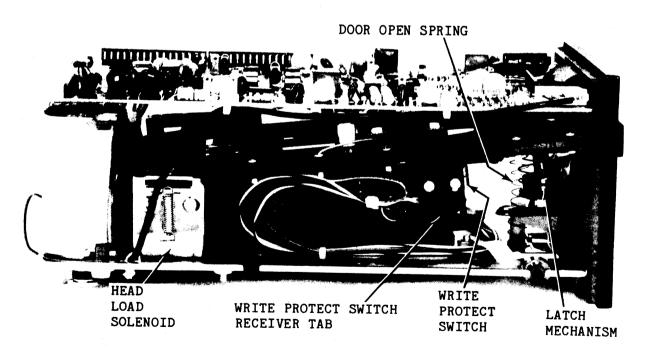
Head Load Solenoid, Write Protect Switch, and Latch Mechanism
